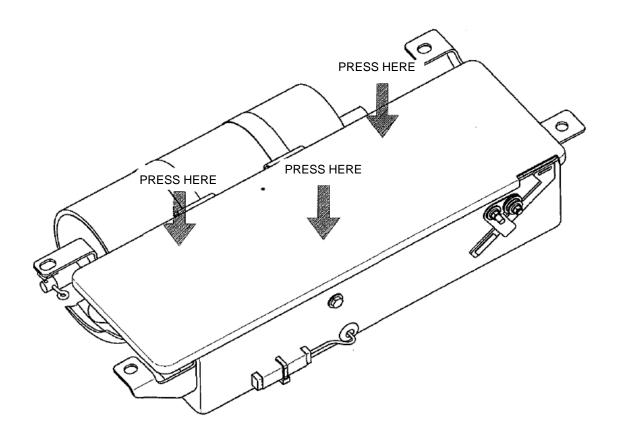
Closing the Door on the Rear (AFT) Flight Attendant Mask Assembly
